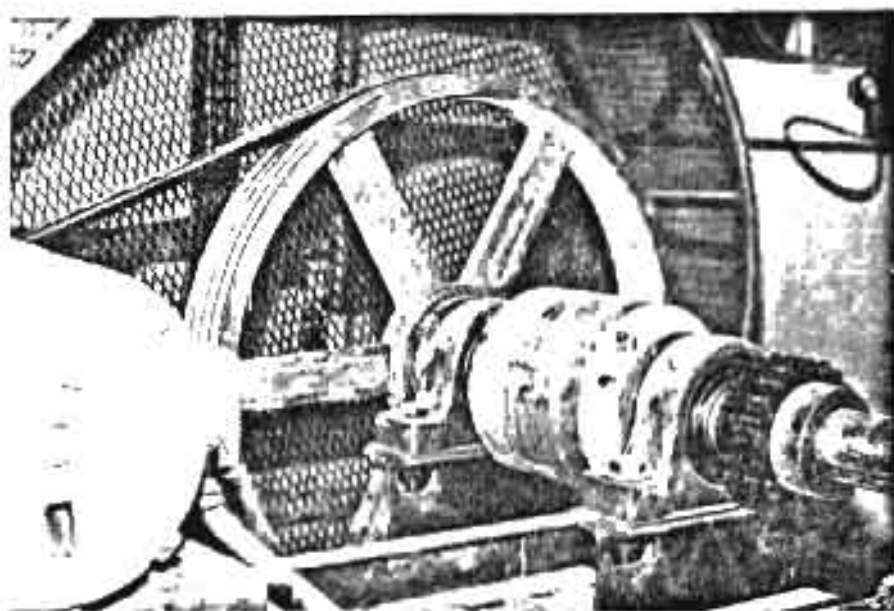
Photograph showing pinion shaft of the 30-in. mill with the belt pulley, the torque sensor and the chain coupling.
